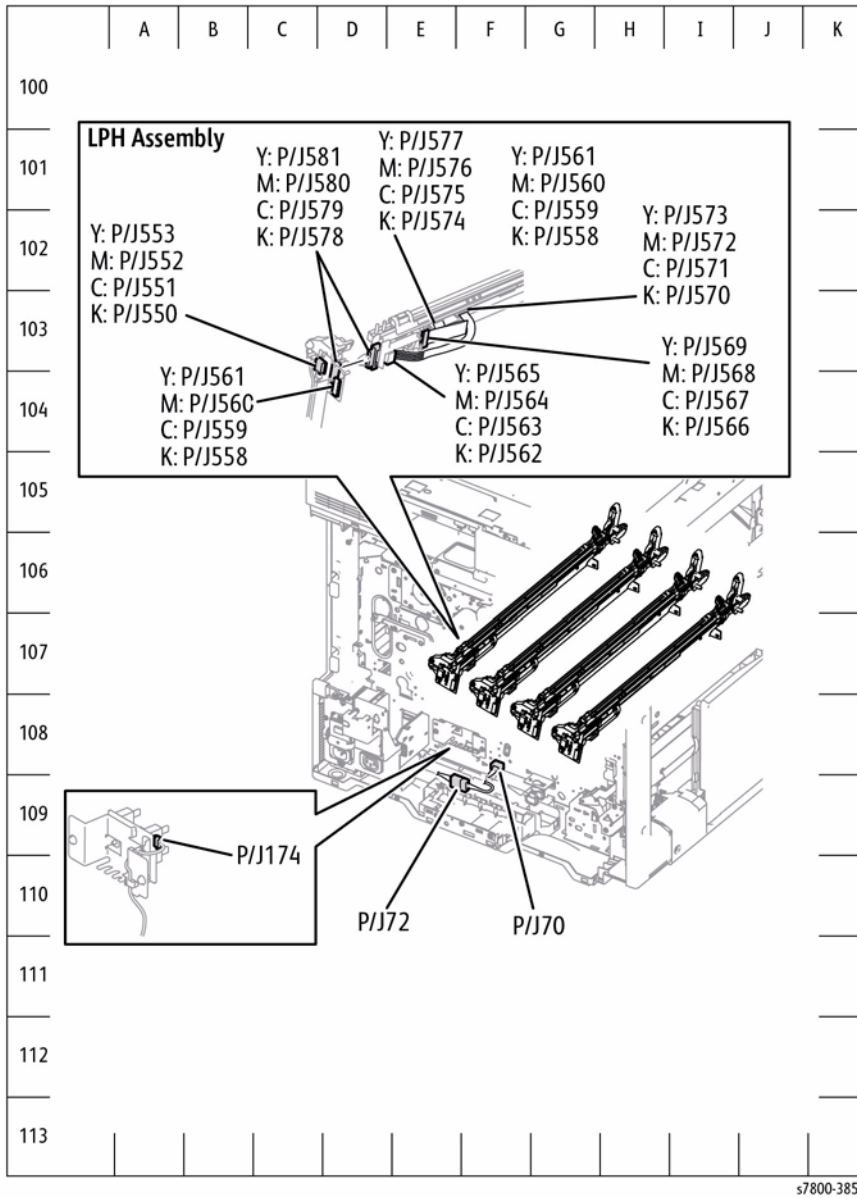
LED Printhead, Tray 2 Paper Size Sensor
